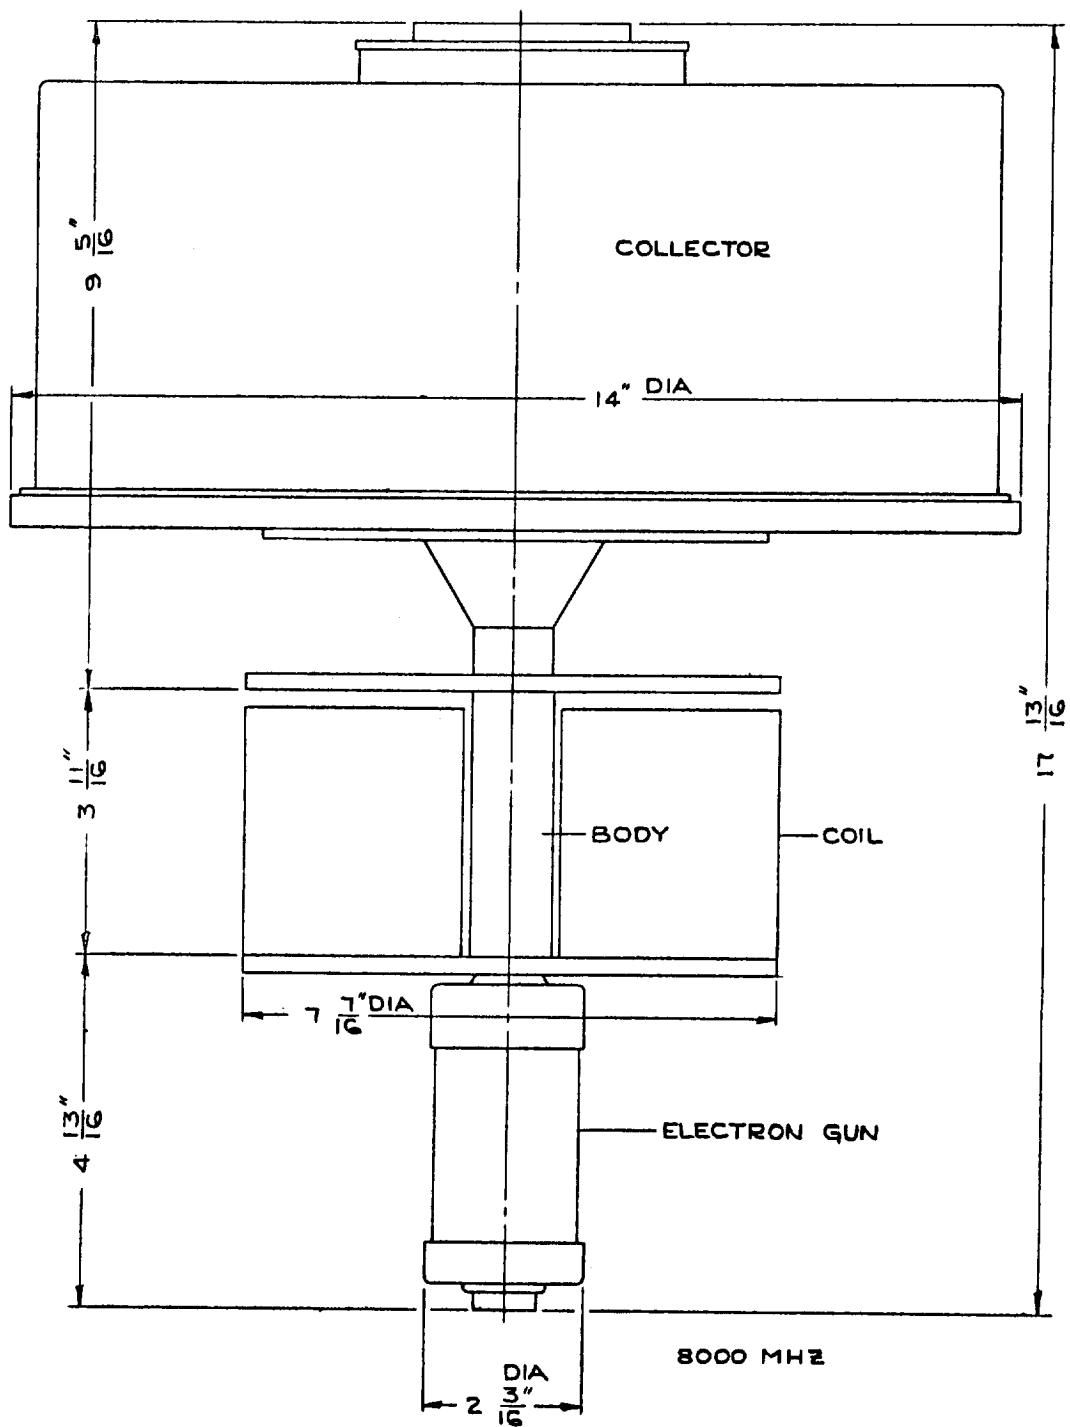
Outline Sketch of 8000-MHz FM Klystron and Solenoid Assembly
